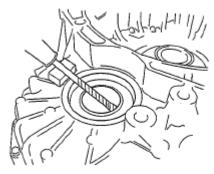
Identifying Oil Pipe Courtesy of MAZDA MOTORS CORP.
